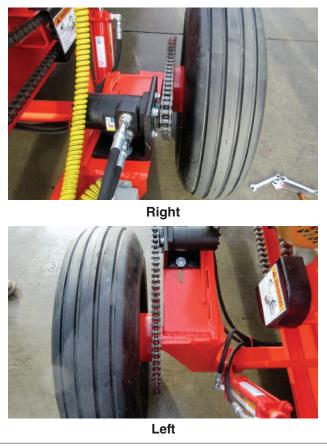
WHEEL DRIVE ROLLER CHAINS
